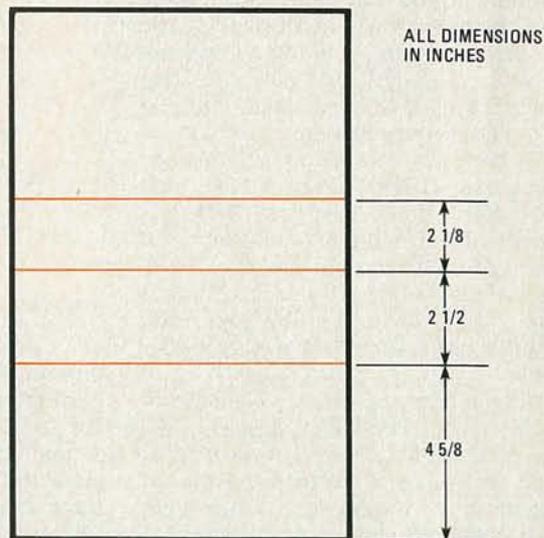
INSIDE OF FRONT, BACK, AND SIDES should be marked as shown. Pieces should also be marked to indicate function ("FRONT," "L. SIDE," etc.).
